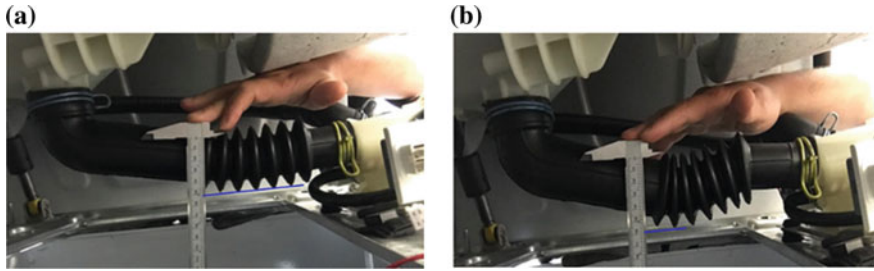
a Outlet hose in empty condition b Outlet hose with full water condition
